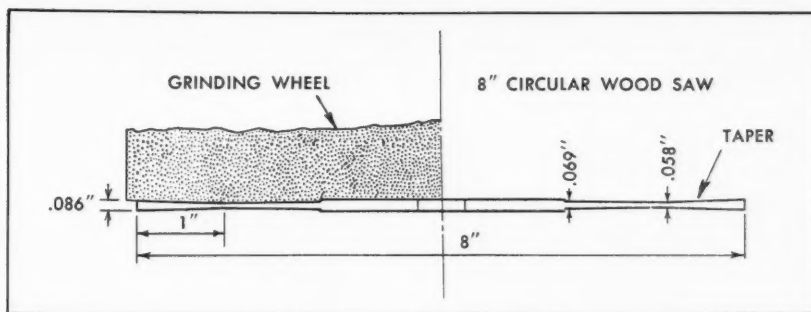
Diagram showing relative positions of wheel and work handled on "Truforming" machine shown in Fig. 1
